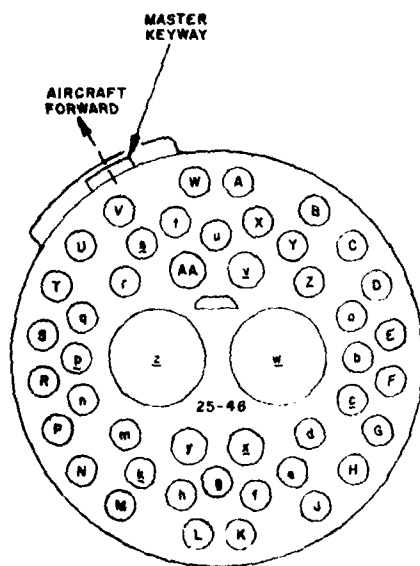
DETAIL LOOKING INBOARD (WITH ELECTRICAL
